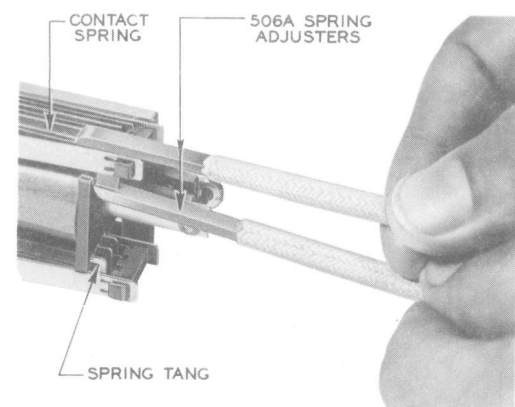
Method of Applying Spring Adjuster for Adjusting Spring Tension
